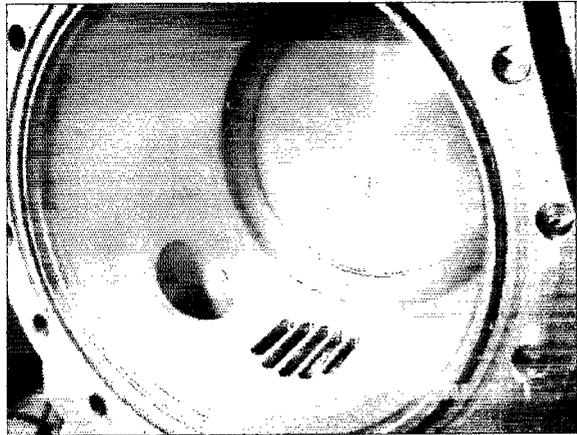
A steel-copper clad test tank with all type of ports made with explosive clad technology.
